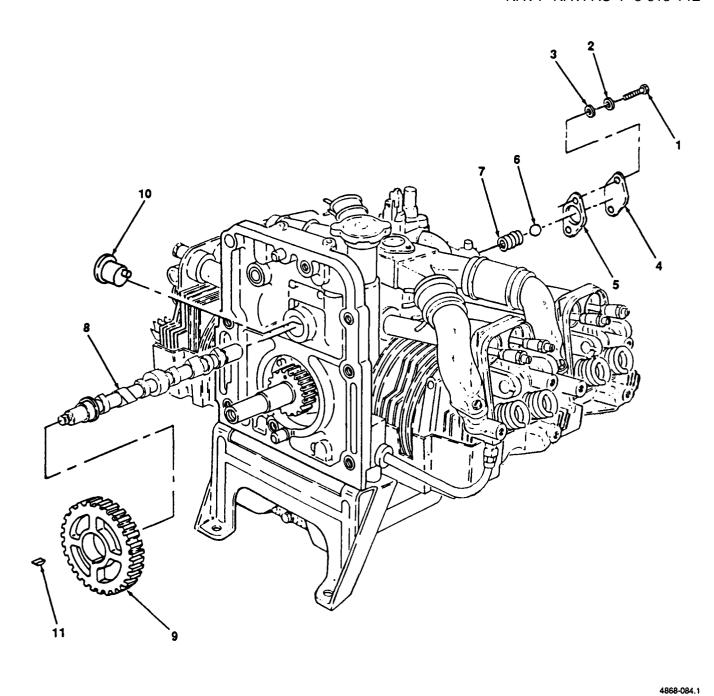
Camshaft, Camshaft Gear, Valve Tappets, and Thrust Plate, Removal and Inspection.
